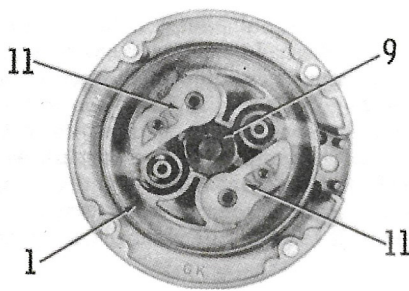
Starter pawls (11) should be positioned as shown when reassembling. Be sure wave washer (9) is installed.
